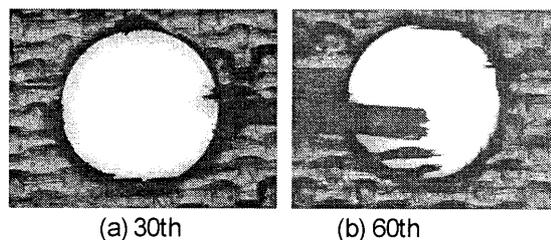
Photographs of hole exit when drilling by ultra sonic vibration cutting
